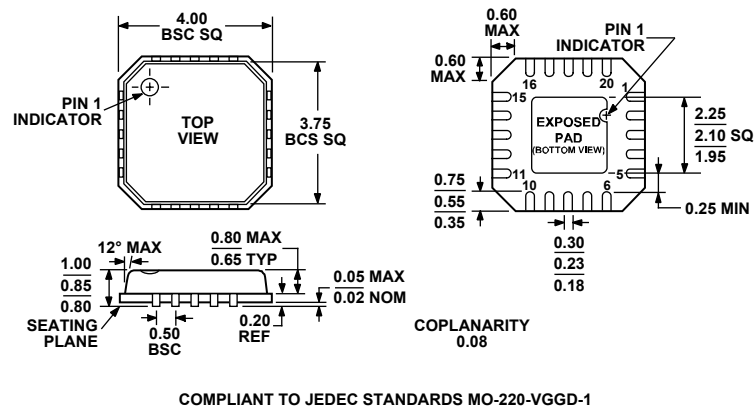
20-Lead Lead Frame Chip Scale Package [LFCSQ\_VQ]
